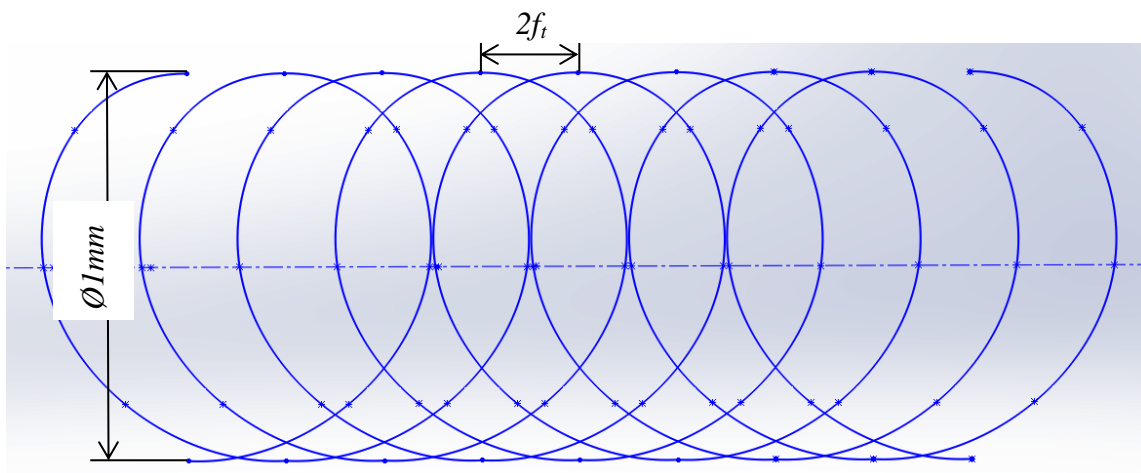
SolidWorks Simulation of the Tool Cutting Edges Motion (Top View). Chip load 0.254mm/tooth, Diameter of Tool Section 1mm.
